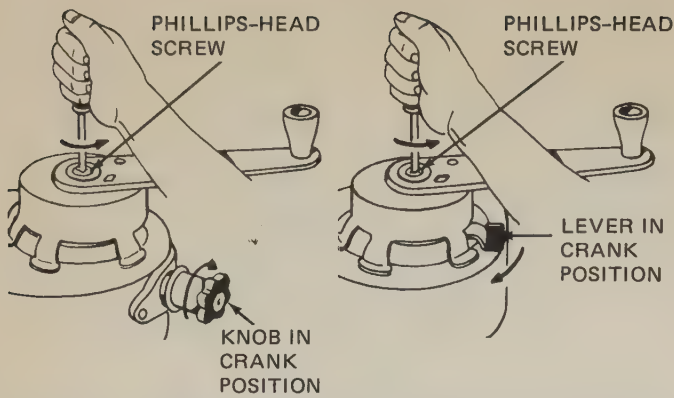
Releasing the windup spring by removing the Phillips-head screw. Hold the handle with one hand while removing the screw.
